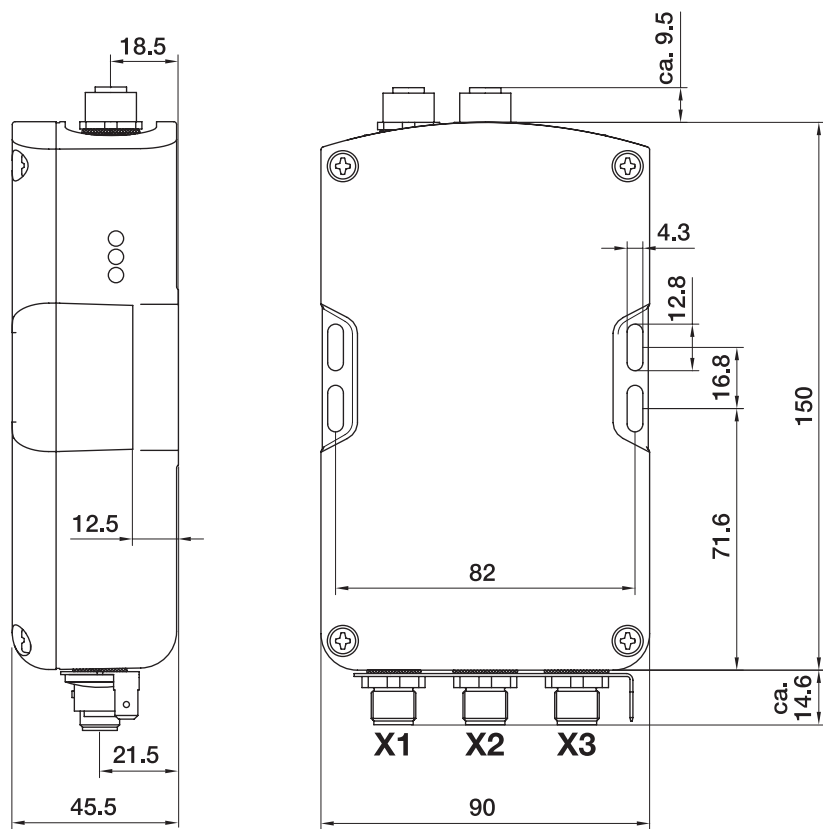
BIS M-6000-007-050-00-ST24 – dimensions in mm
